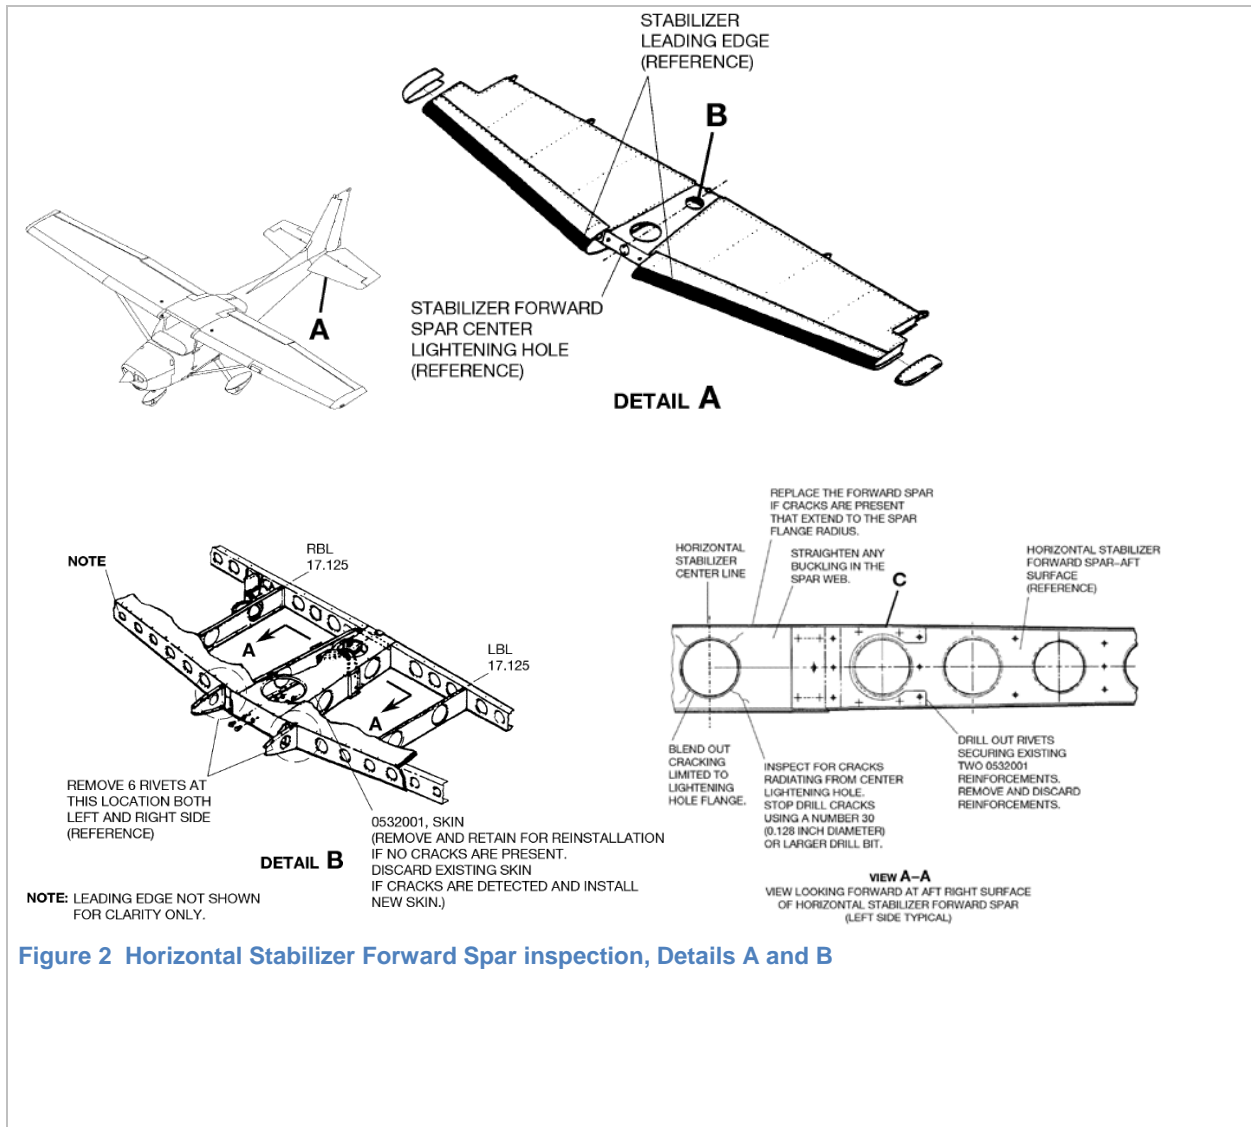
Horizontal Stabilizer Forward Spar inspection, Details A and B
